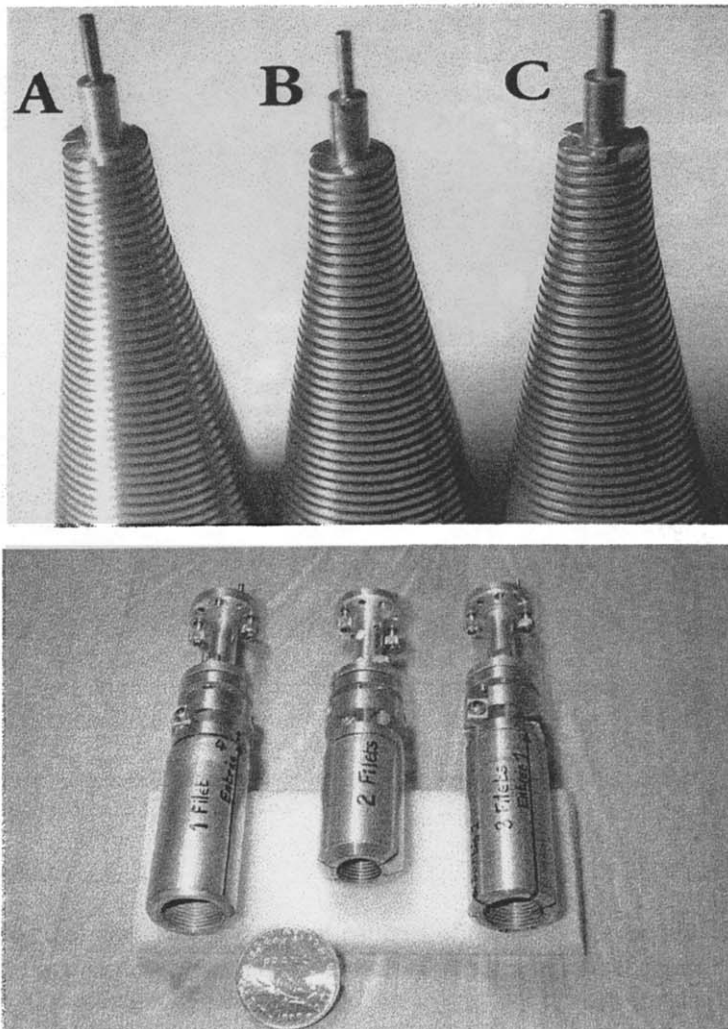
(a) Photograph of the three helicoidal aluminum mandrels designed for 110 GHz with one, two and three threads ; (b) Photograph of the fabricated helicoidal horns mounted to their rotating circular waveguide adapters.
